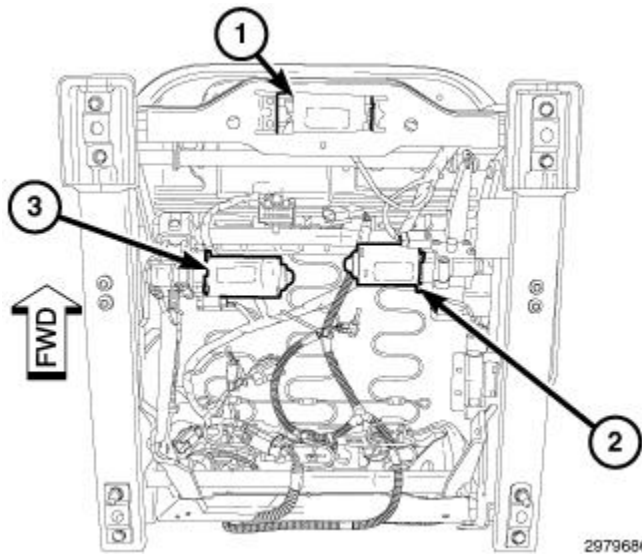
Fore/Aft Motor, Front Tilt Motor & Rear Tilt Motor
